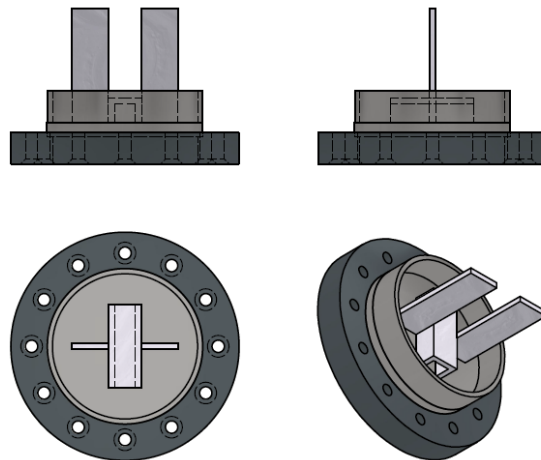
Fan module, consisting of the outer lid, the inner ring and a swirl based fan geometry. Magnet fits inside the rectangular base
